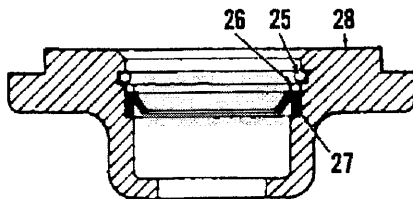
Lower main bearing cap seal (27) must be installed with lip down, away from main bearing. Refer to Fig. E3-17 for legend.
